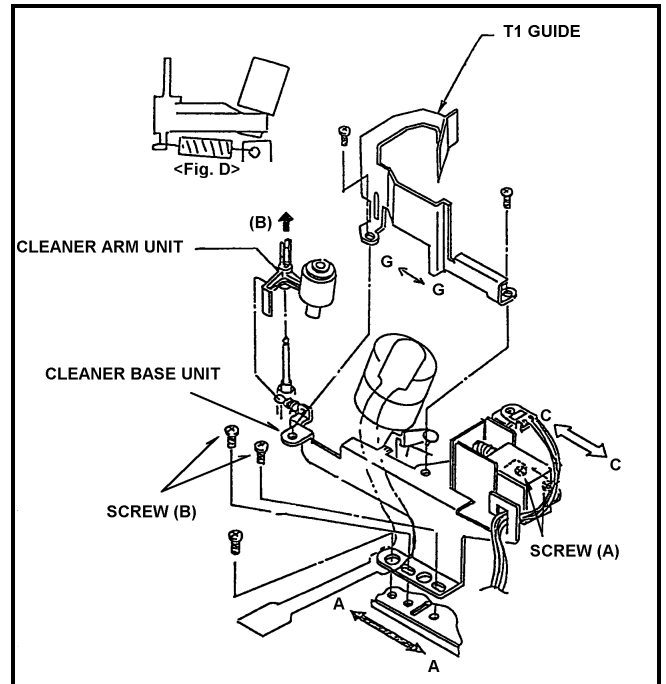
Cleaner Solenoid Position Adjustment (1)
